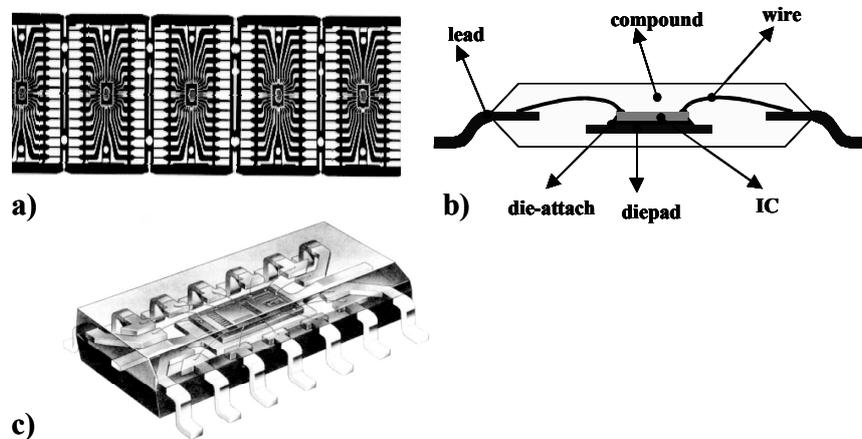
Picture of a) leadframe, b) QFP cross-section and c) 3D view of a package.
